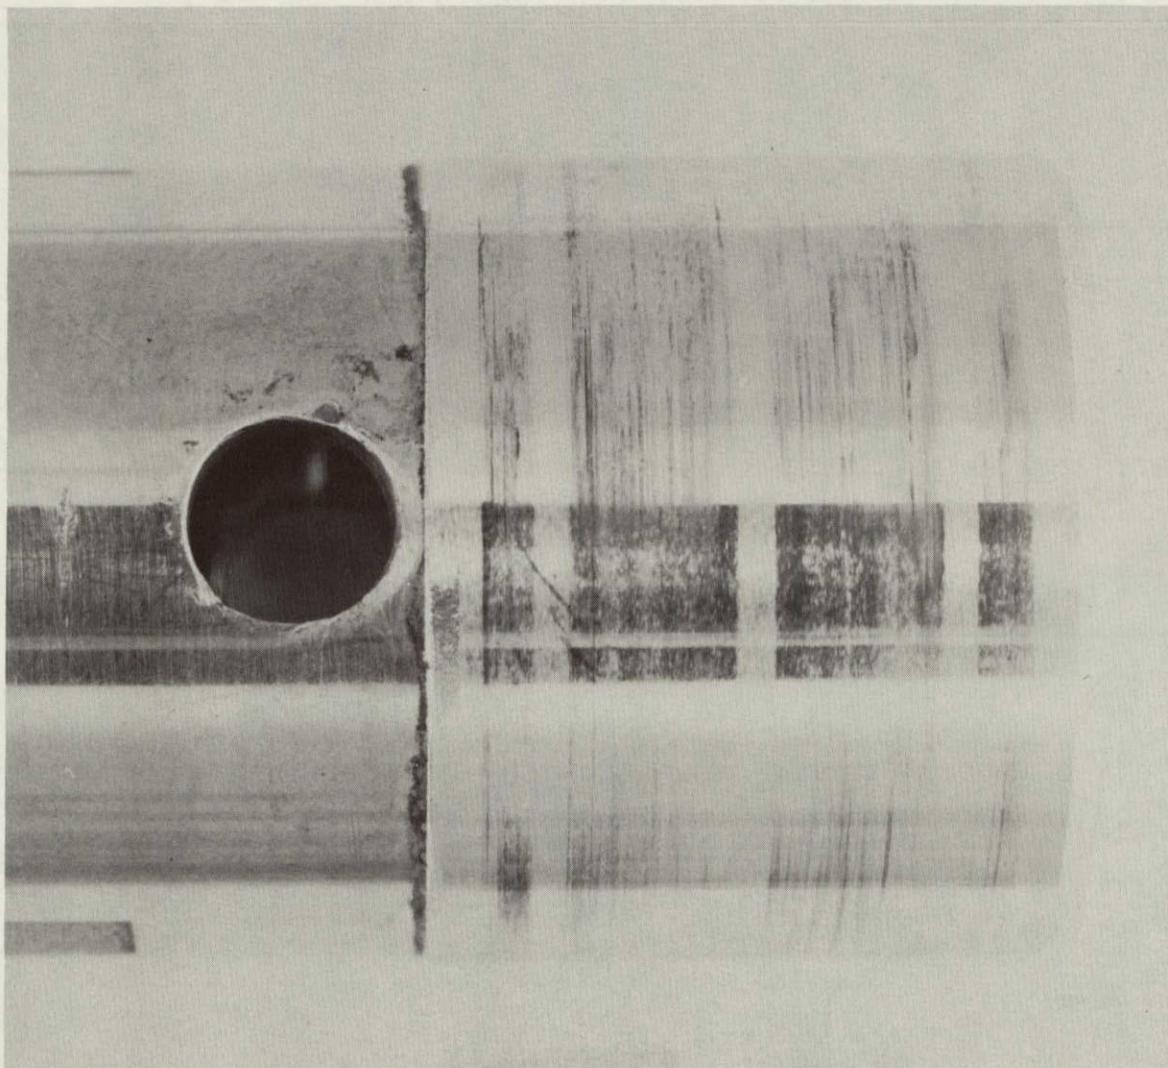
Helium Seal Turbine Side Seal Ring (RS009690X,
